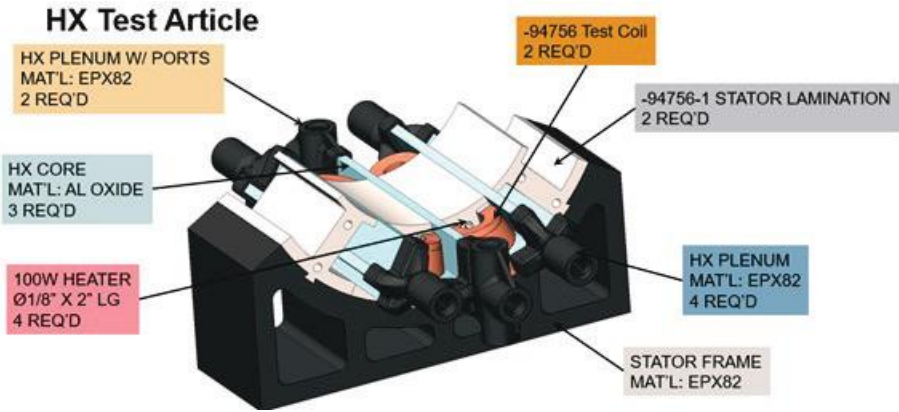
Sectional prototype test assembly with integrated fixture.
